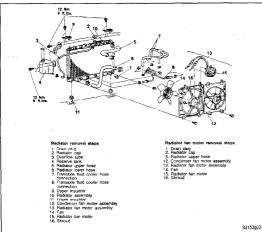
Exploded view of the fan mounting and related components— Diamante
